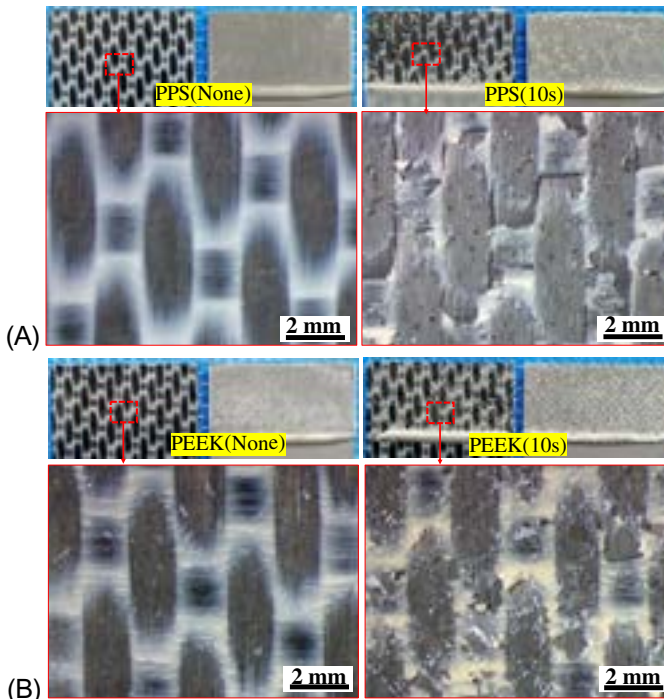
Typical photographs and microscopy images of the failure surfaces of the lap shear specimens of the TPC-Al joints. (A) PPS-Al Joints; (B) PEEK-Al Joints.
